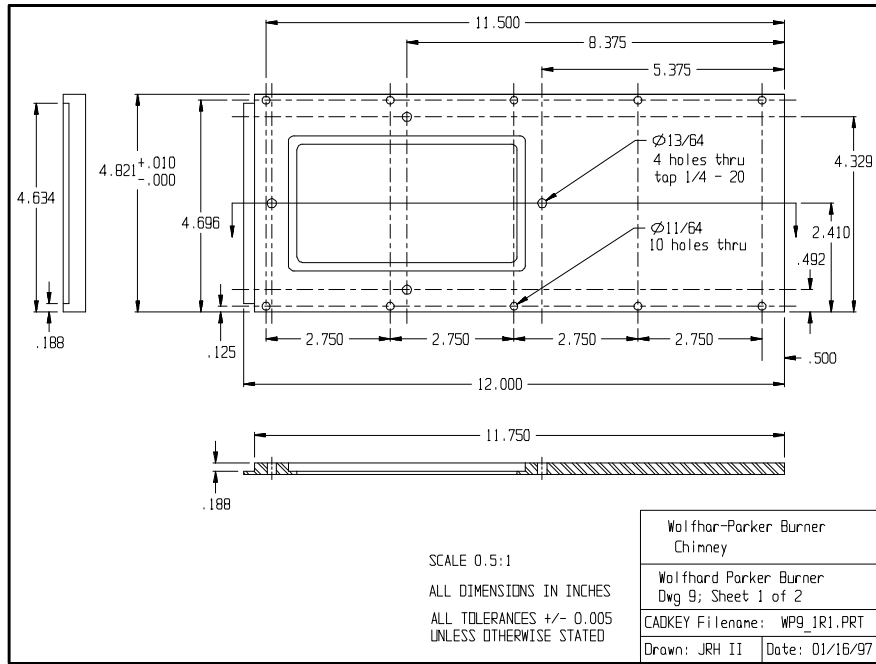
Burner Surround North and South Walls, Drawing 9 Sheet 1 of 2
